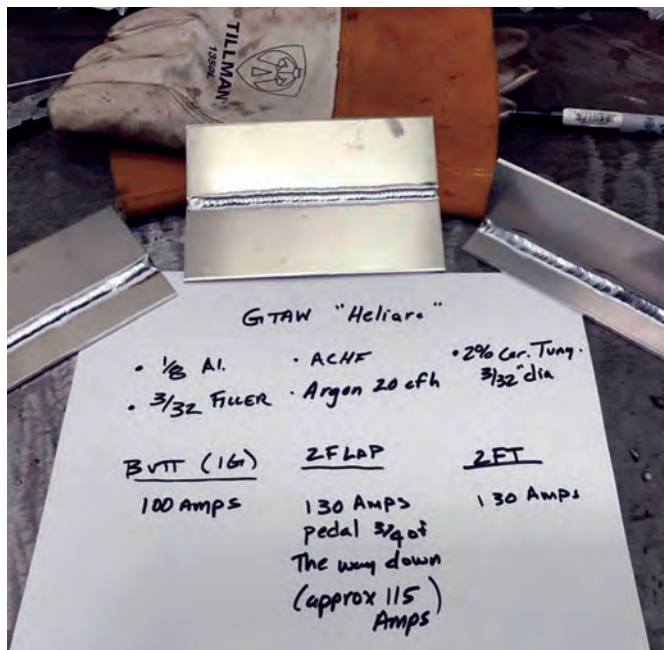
A PCC instructor's setup prior to an online welding demonstration of gas tungsten arc welding for remote students.
